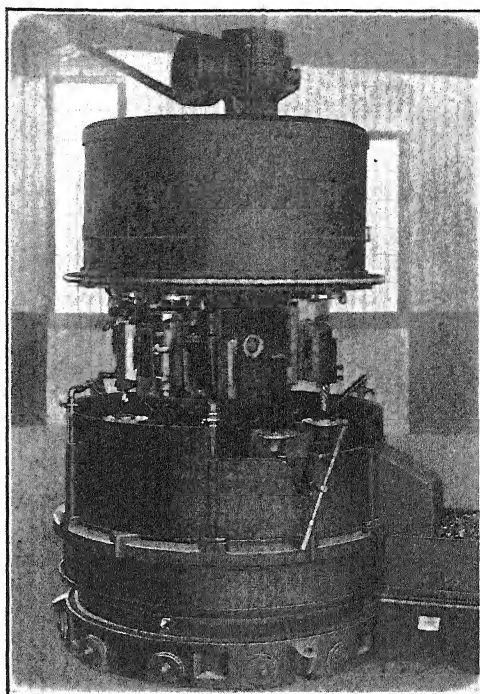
The Bullard Mult-Au-Matic, Vertical, 6-Spindle Turning Machine.
